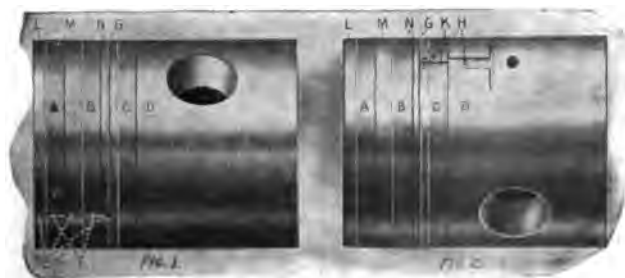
Diagrams showing Oil Groove Arrangement in the Cadillac Piston.
